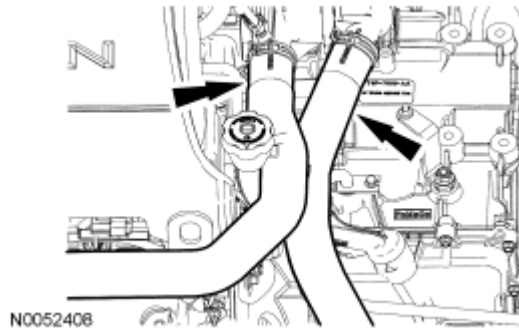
Identifying Coolant Hoses From Transmission Fluid Filler Tube
